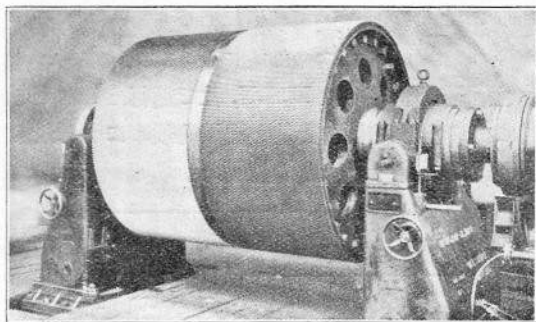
One of the Main Gearwheels driven by Pinions coupled to Four Diesel Engines, Two on Each Side.
